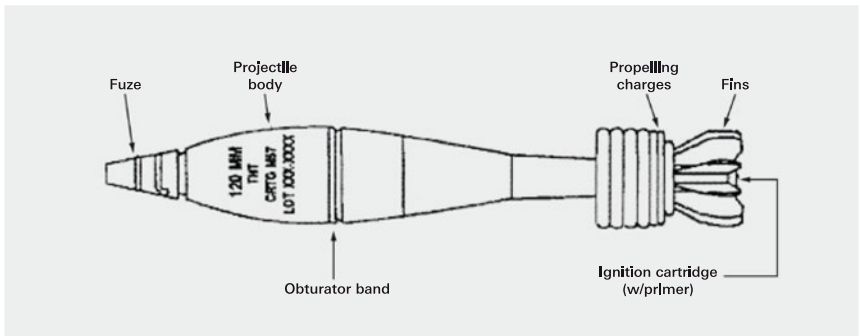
Arrangement of a typical mortar projectile (source: U.S. Department of the Army, 2007).
